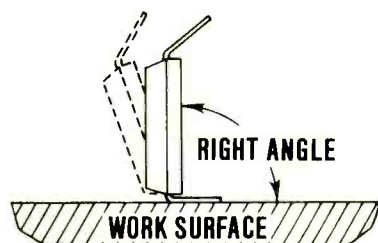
HOW IC PINS ARE PREFORMED so they are perpendicular to the body before the device is mounted on the PC board.
